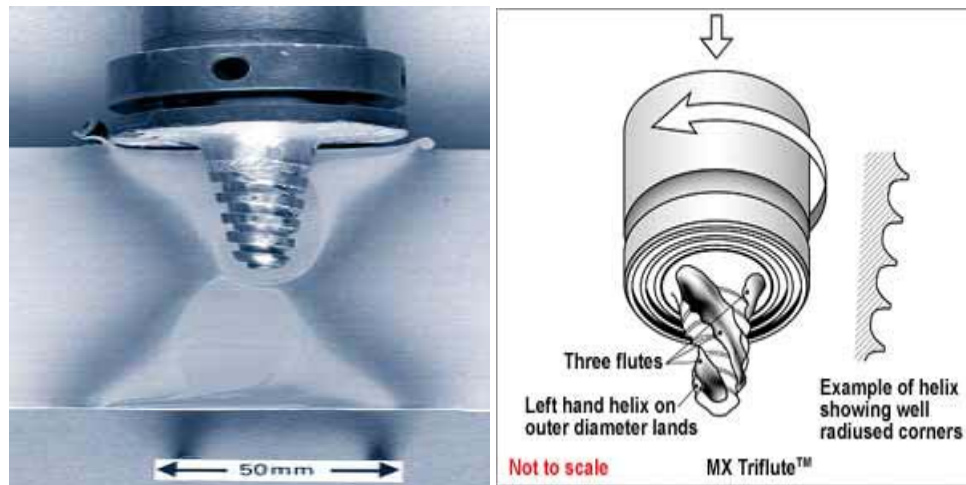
a) Prototype Whorl™ tool superimposed on a transverse section of a weld
